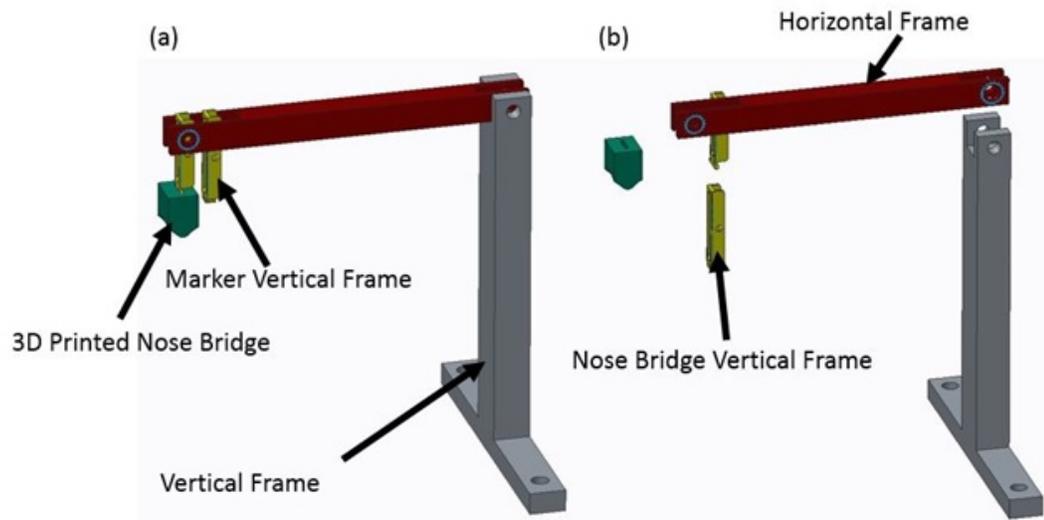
(a) Assembly view of Stereotactic Frame, (b) Exploded View of Stereotactic Frame
